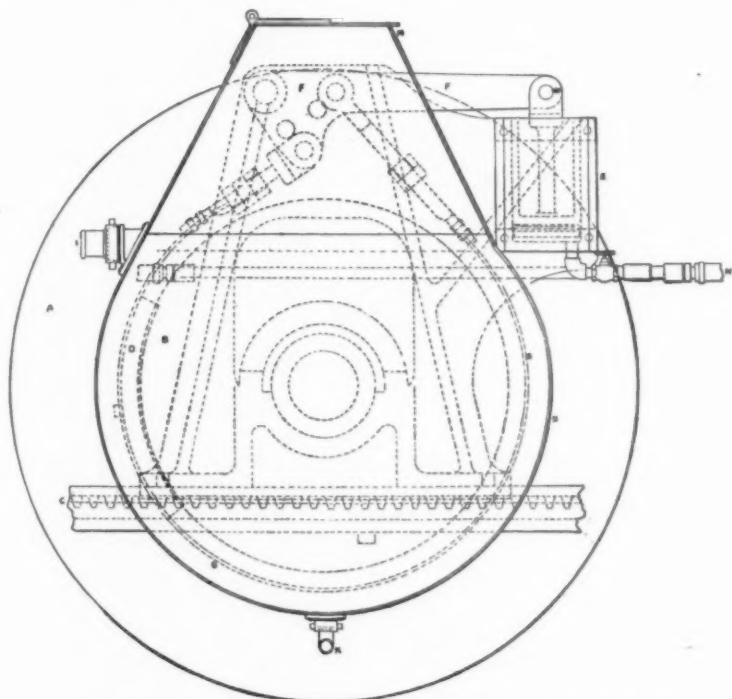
BRAKES. ENGINE TESTING PLANT. C. & N. W. RY.
